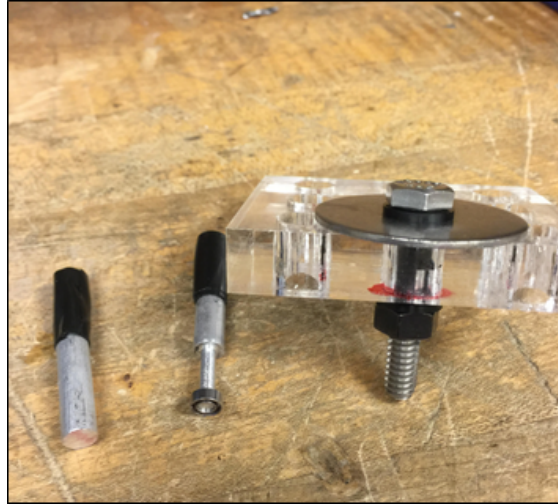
From left to right, the spin-less roller, the machined roller with bearing, and the #10-32 $\frac{3}{4}$ " fastener with roller bearings and flange. All are to be tested with Kinovea to determine which shows the best performance by measure of period.
